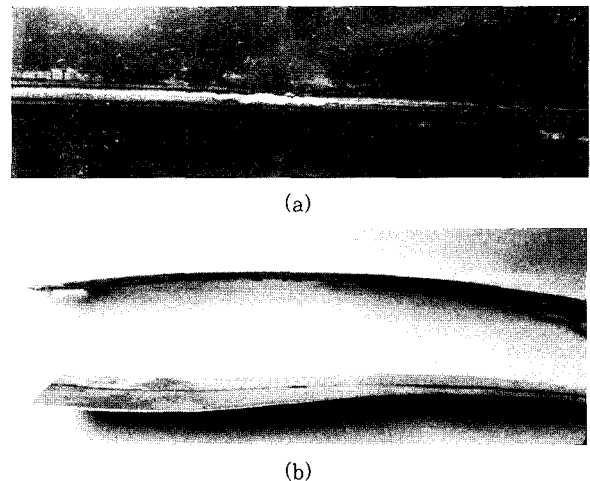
Phenomena of burn through and distortion at thin plate welding
